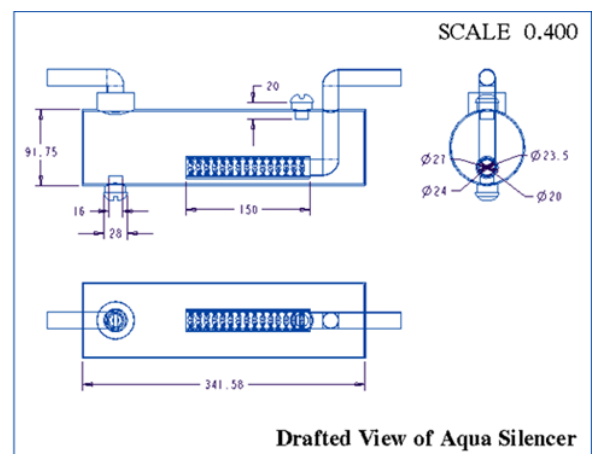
Two-dimension view of Aqua silencer with its dimensions
